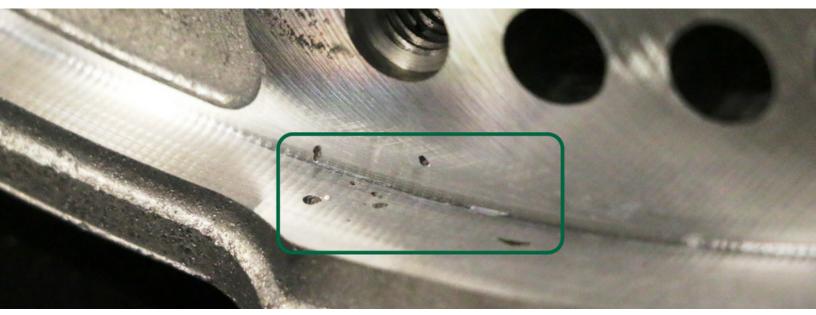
Vacuum impregnation will not seal this surface porosity. There is not enough casting material for the sealant to adhere.
